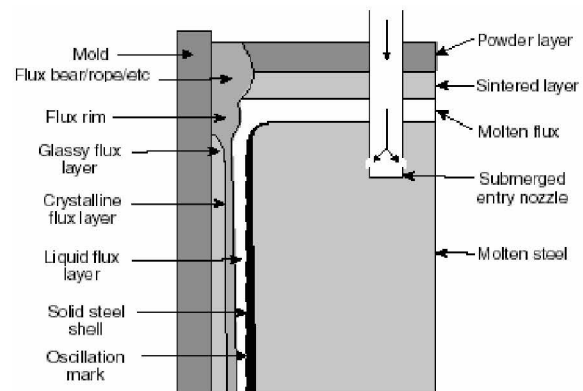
Schematic drawing showing various flux layers formed in the mould.
